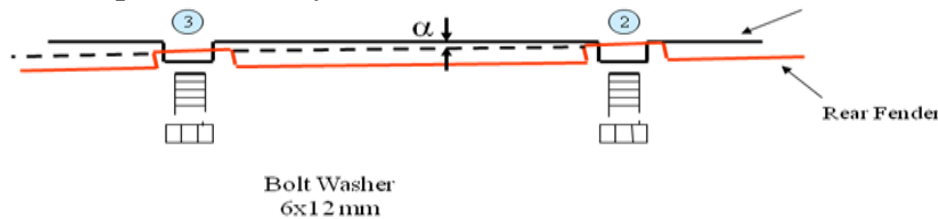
Rear Fender's position to Stay Rear Fender On Hole 2 and 3
